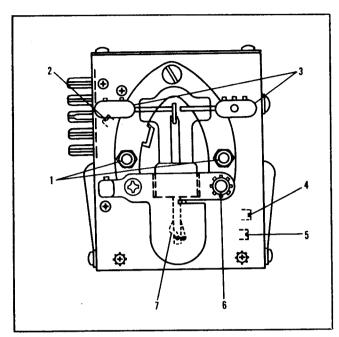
Keying Relay K102 and Vacuum Contact S116
